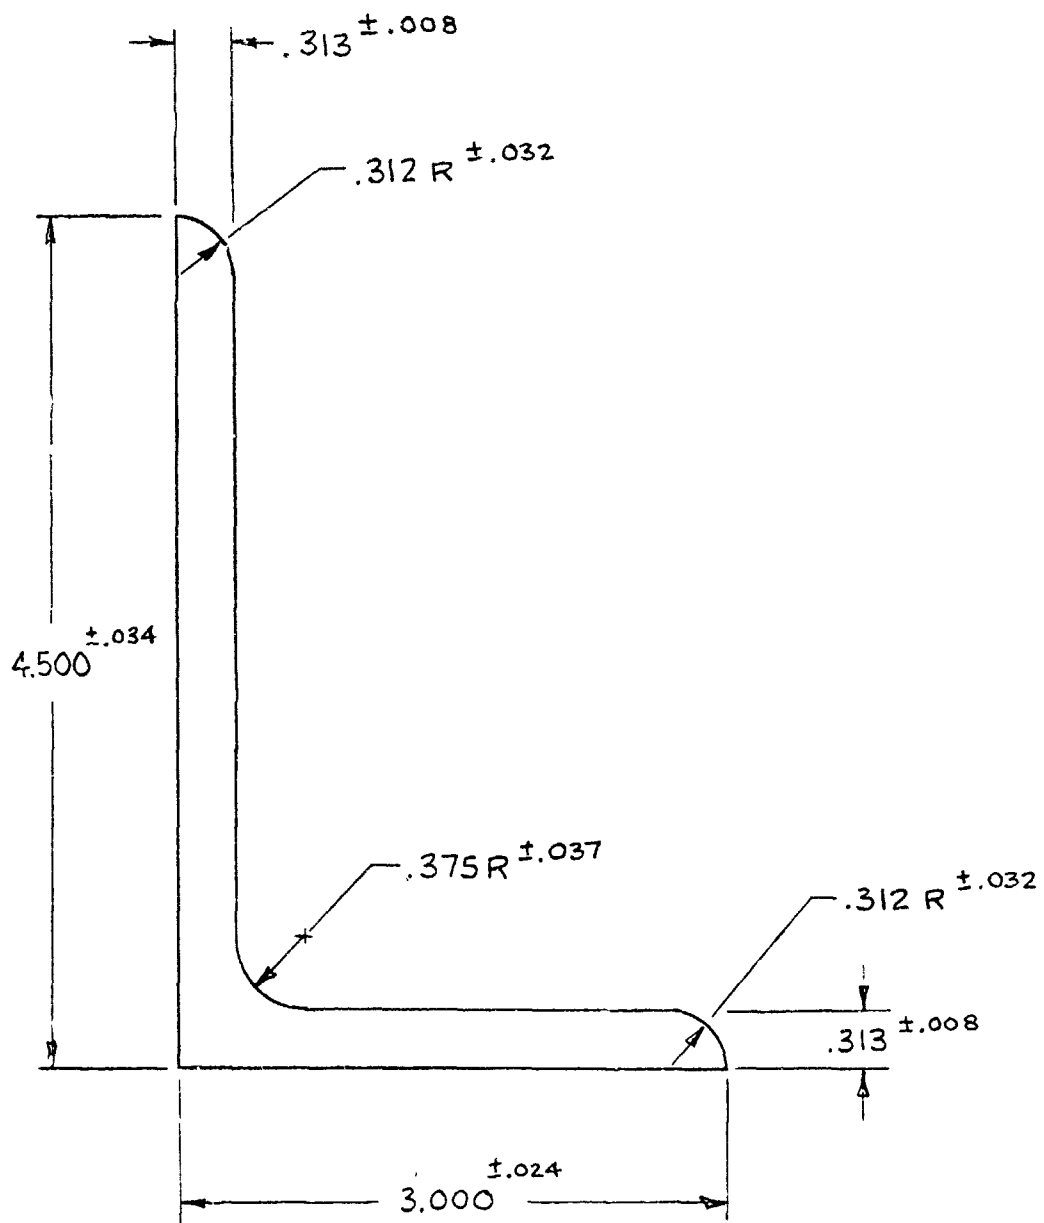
7075-T6511 Aluminum Extrusion for Specimen Type R2.
